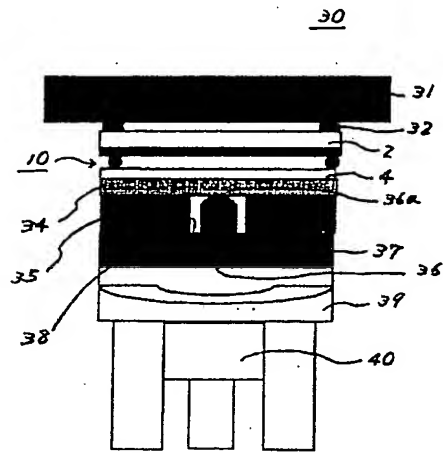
It is the explanatory view of the main parts which constitute the manufacturing installation of the improved conventional liquid crystal display component.
